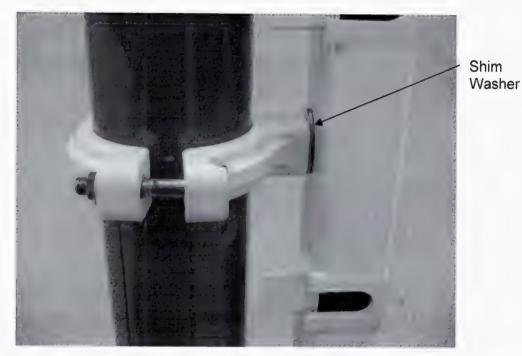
Beam Adjustment, Step 1 - Shim Rear Beam
